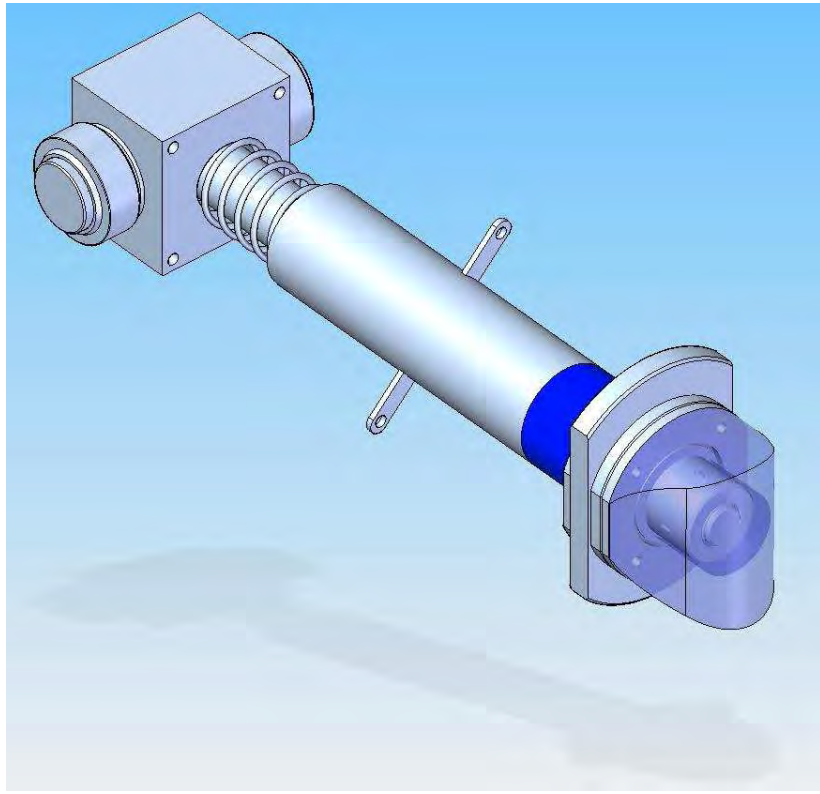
Part of twist lock mechanism. Twist lock rod with turning flex. tube.
